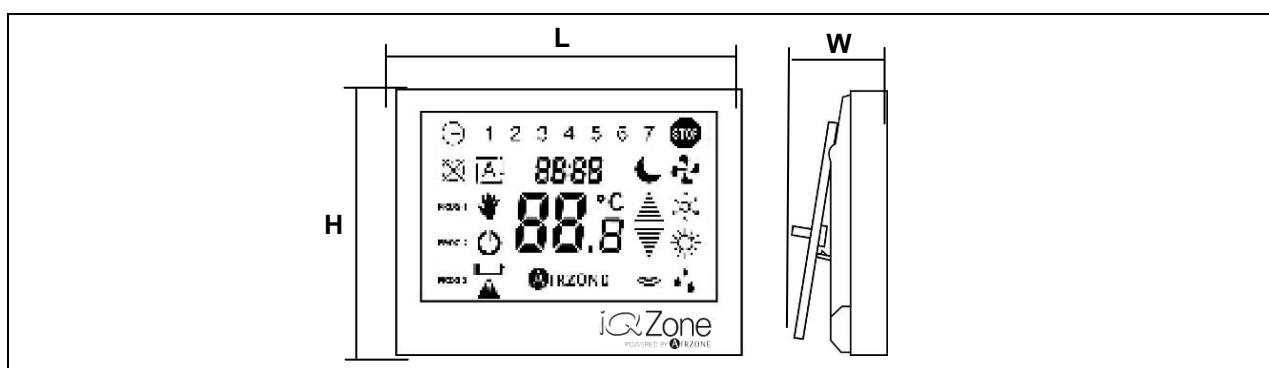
Zone Thermostat Dimensions. (Refer to table in Section 7.5.)
